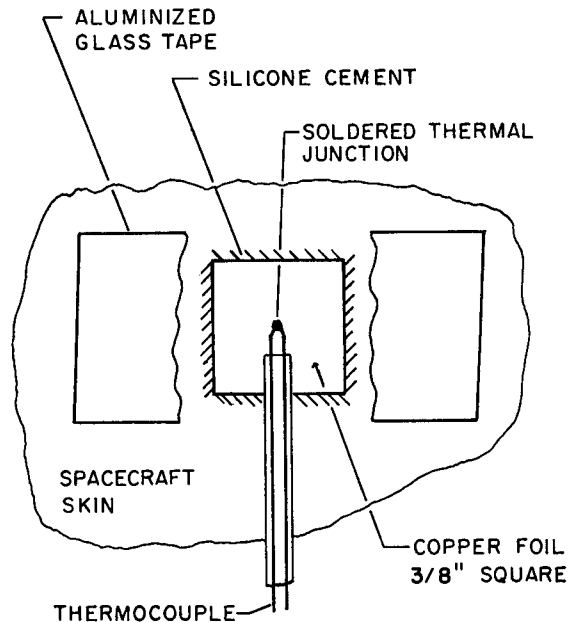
Installation technique used at JPL for attaching thermocouples to the spacecraft skin.
